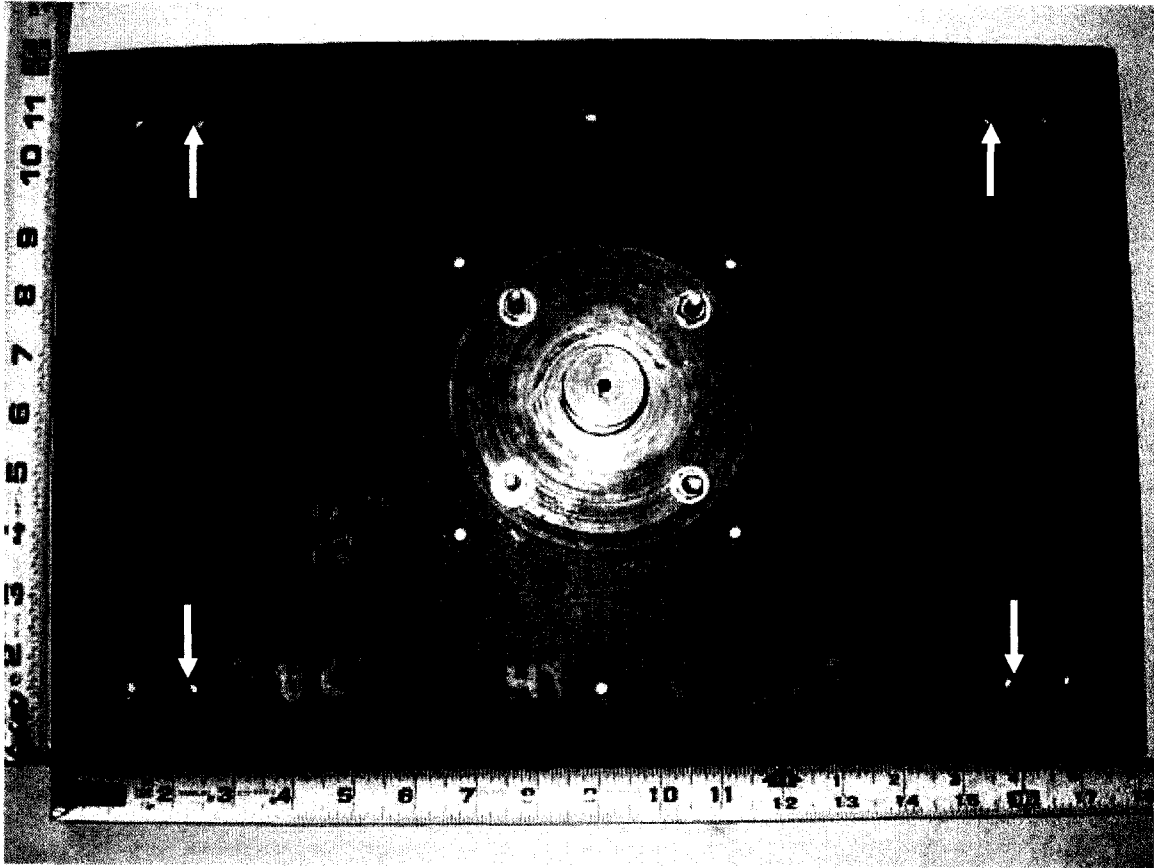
Stress Plate with Attachment Holes Illustrated
